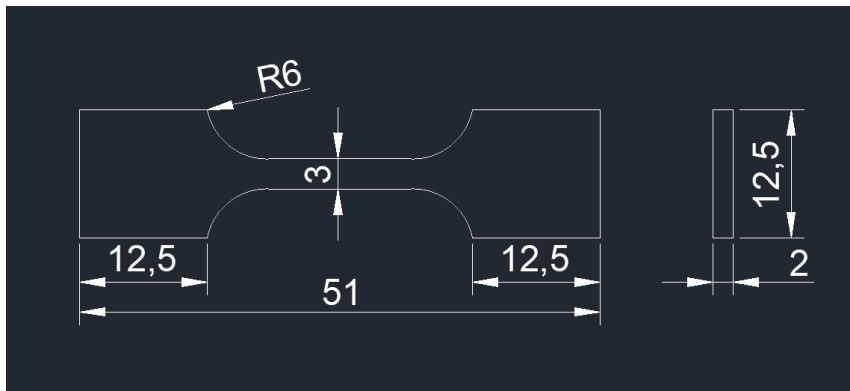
3. Reduced specimen for the tensile specimen geometry and shape.
